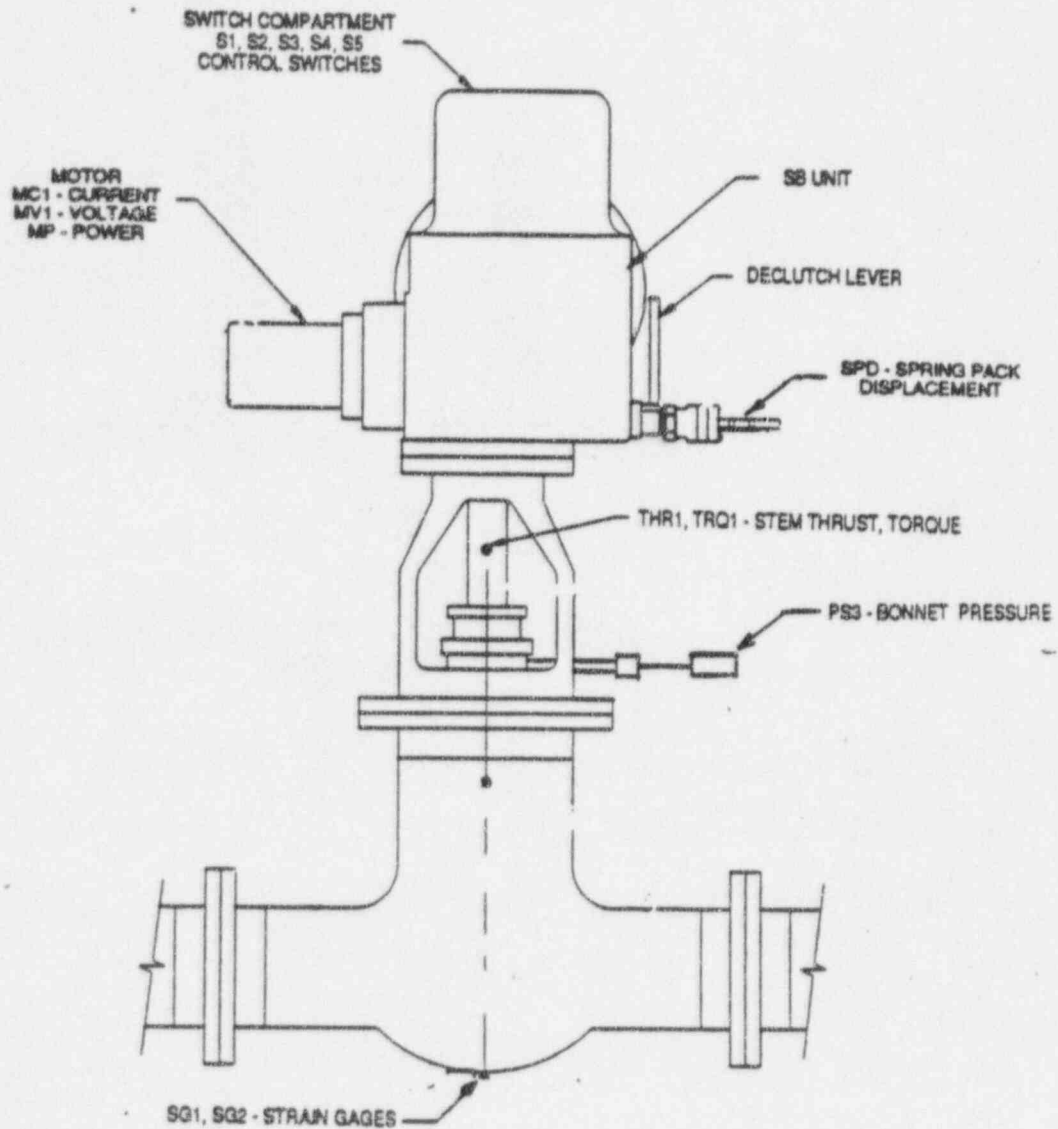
TEST SPECIMEN, MOV INSTRUMENTATION
